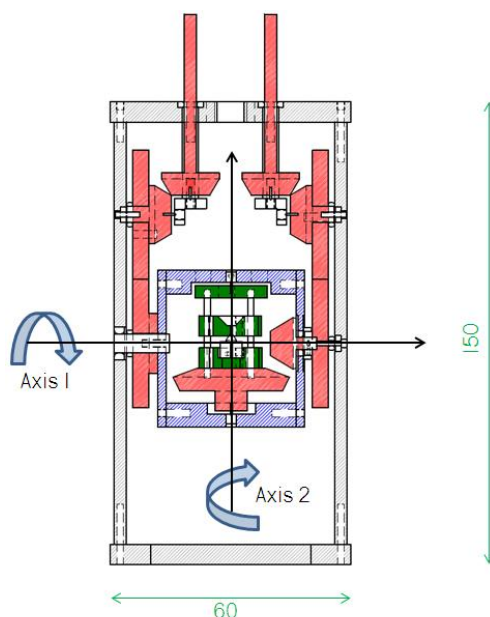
Cross-sectional view of the 2-axis rotator with the rotation axes indicated. All dimensions are in mm.
